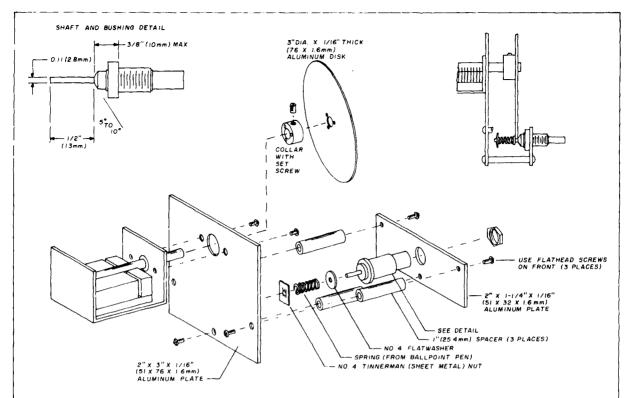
Exploded view of the 24:1 slow-motion drive, with the shaft and bushing detail at the upper left, and a side view of the assembly sequence at the upper right. One of the flathead screws on the front goes through the front panel to prevent rotation of the assembly around the bushing.
